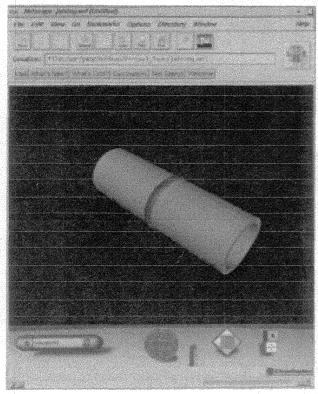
Two pieces of silicon - carbide tube SALD joining process.
